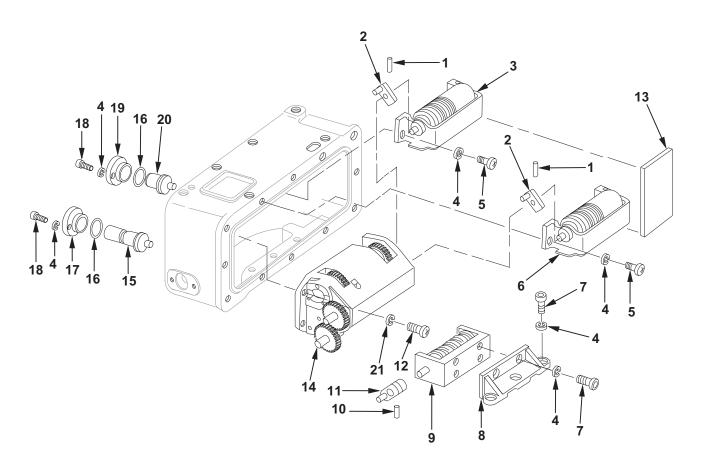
Counter Box Assembly, M137, 11741102-1, and Counter Box Assembly, M137A2/M137A3, 12984734, Parts.
